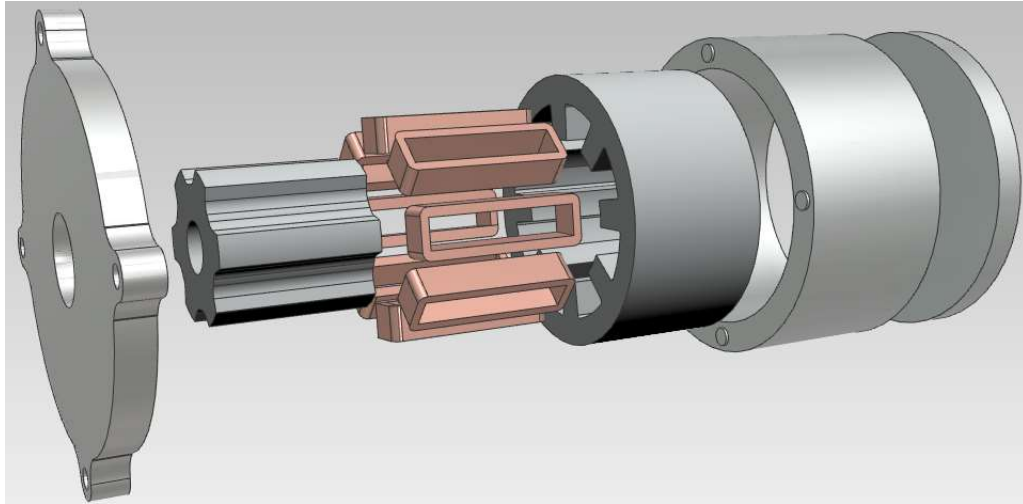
Exploded view of the baseline 8/6 motor assembly
